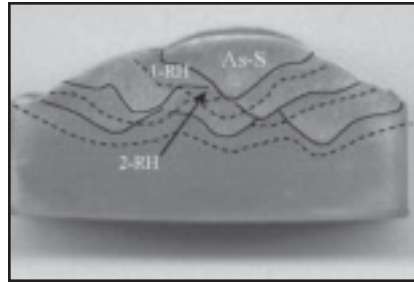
Macrophotograph of the multipass weld B5 with lines designating the different weld zones: as-solidified weld metal, once-reheated zone, and twice-reheated zone.
